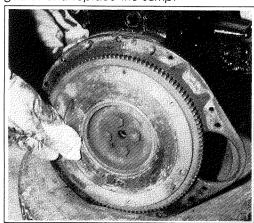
Prior to fitting a new clutch, give the flywheel a clean with thinners or some other suitable degreasing solvent.
